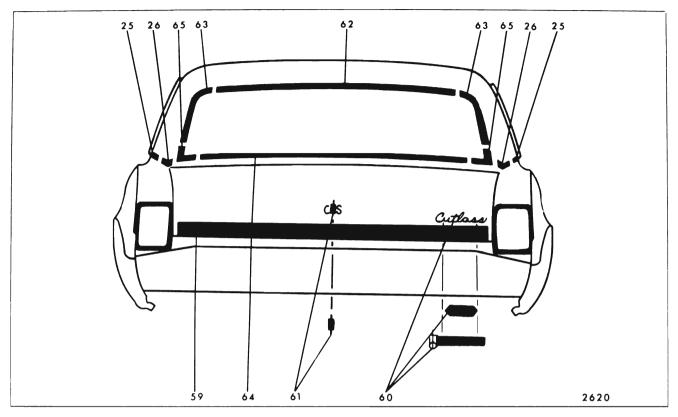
Oldsmobile 33400-33600-33800 (Except 35-55-65 Styles)
